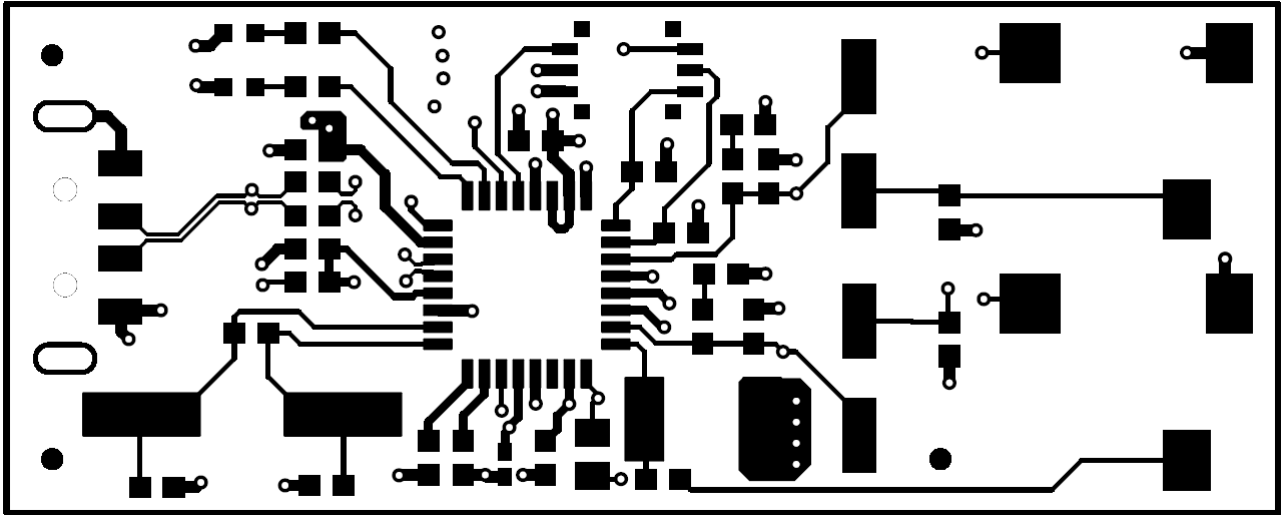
DEM-PCM2912A EVM Board Layout—Top Side
